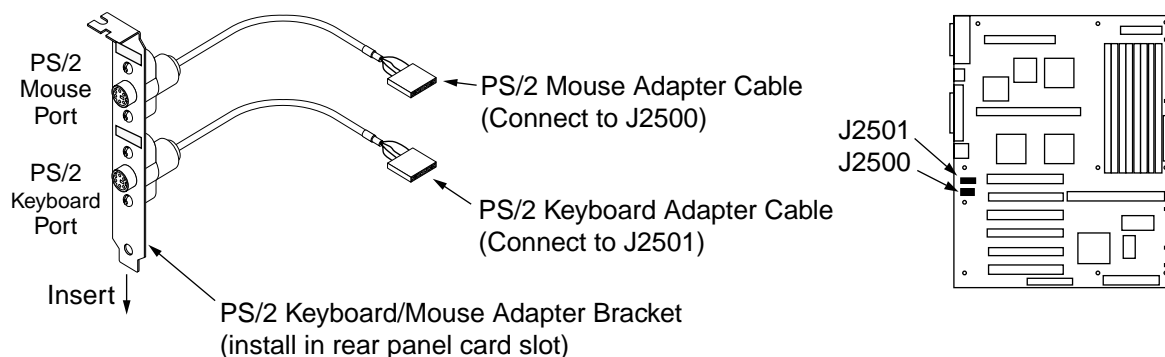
Ultra AXi PS/2 Keyboard and Mouse Adapter
